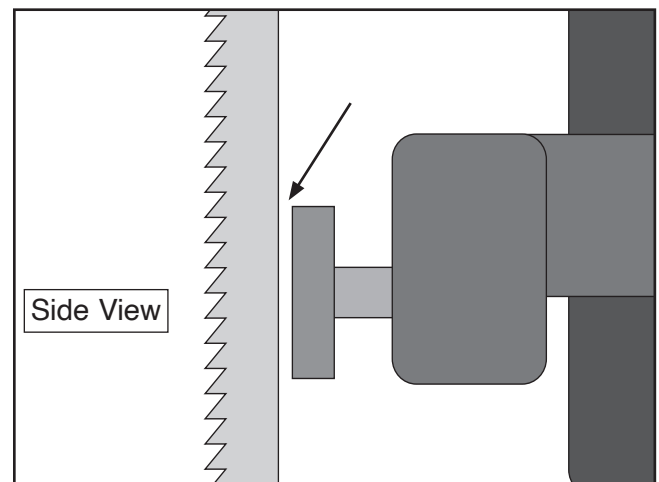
Blade should be aligned approximately 0.016" away from the bearing edge.
